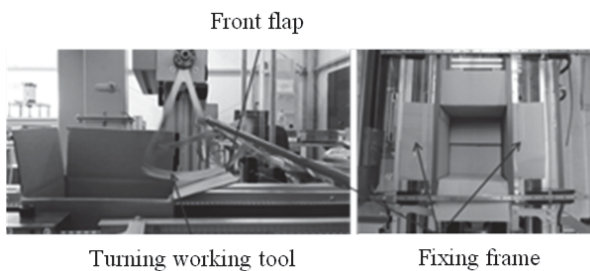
Turning working tool and fixing frame to enable a robust top loading filling
